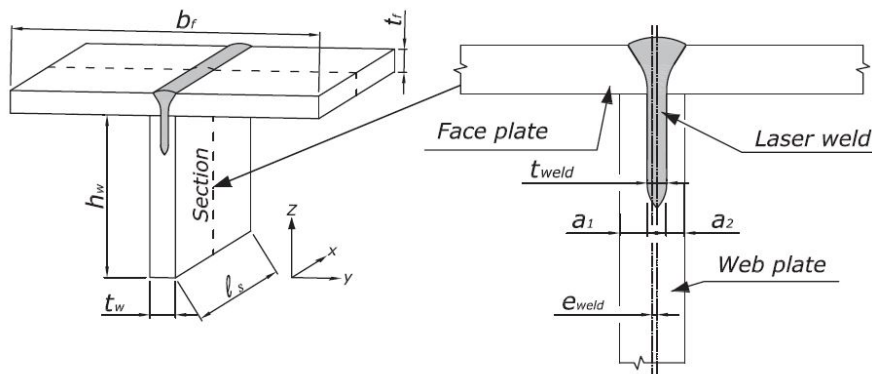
Details of T-Joint, dimensions and weld eccentricity [13]
